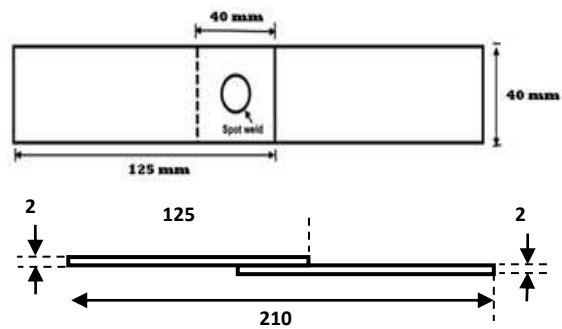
Geometry of mechanical test of specimen AA5052 H112, 2 mm thick in FSSW with overlap join.
